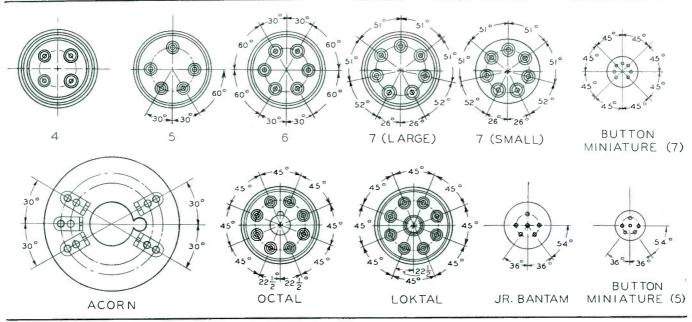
The eleven principal tube socket types are shown in the illustration below.
